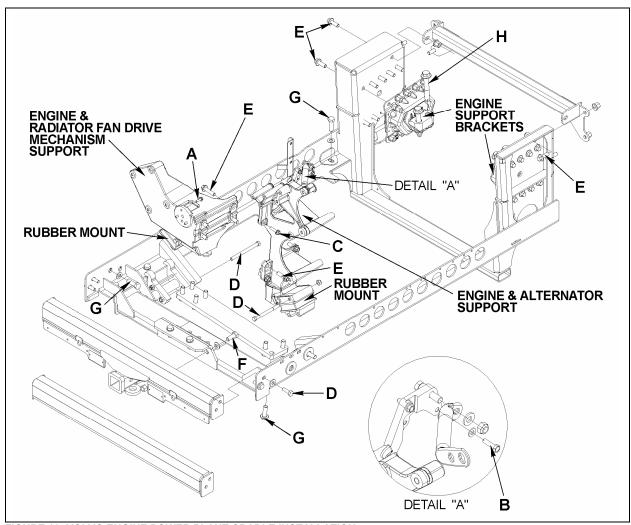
VOLVO ENGINE POWER PLANT CRADLE INSTALLATION
